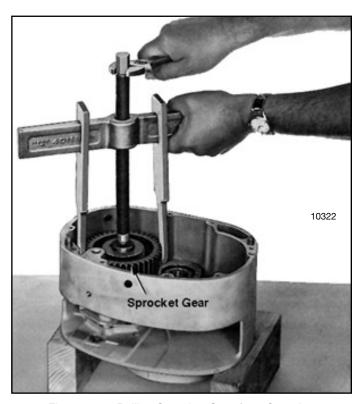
Pulling Sprocket Gear from Sprocket Shaft using Common Puller
